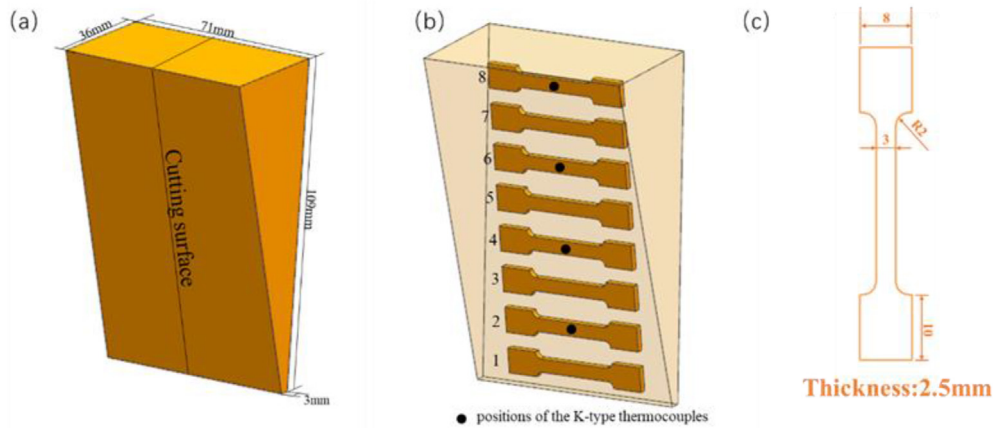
Schematic drawings of the casting block obtained by wedge casting: (a) Shape and dimensions of casting block; (b) Positions of tensile specimens and K-type thermocouples in casting block; (c) Shape and dimensions of the tensile specimen.
